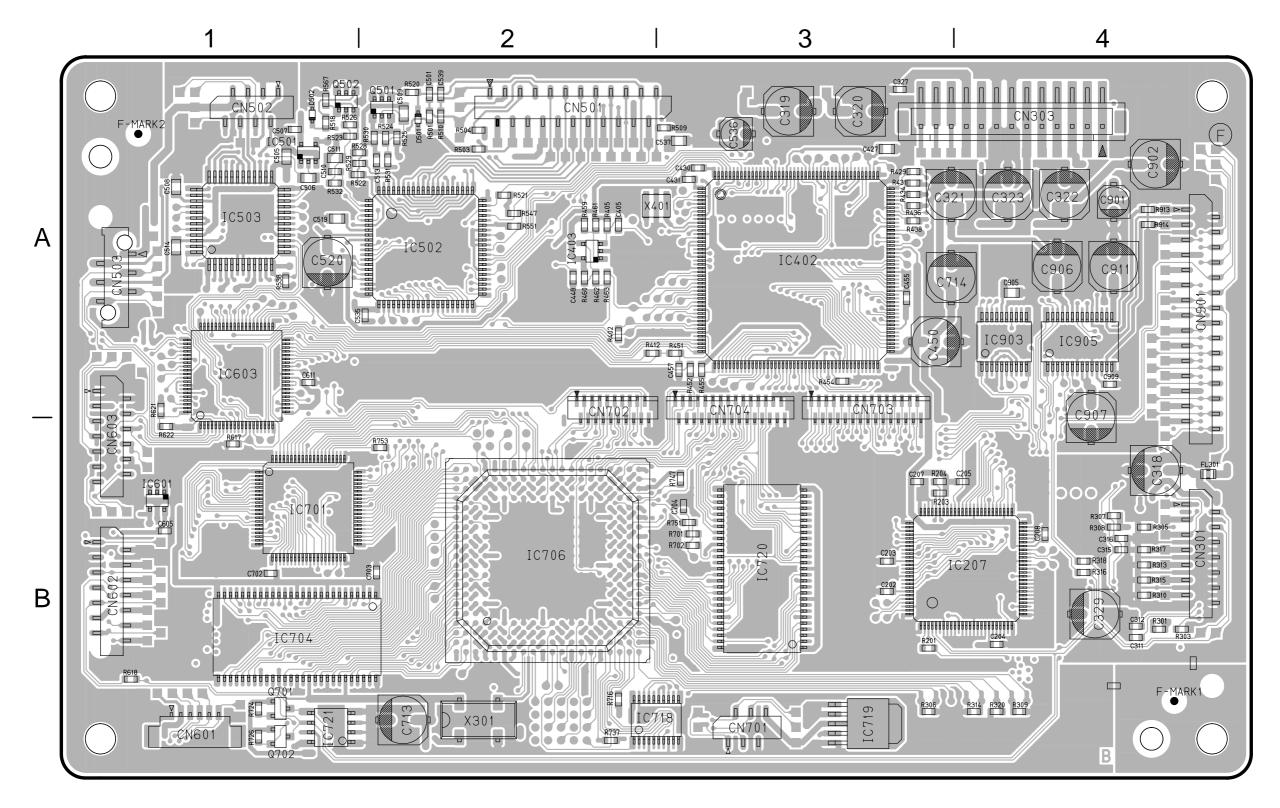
EU01 Main PC Board (Top pattern and Top parts location diagram)
